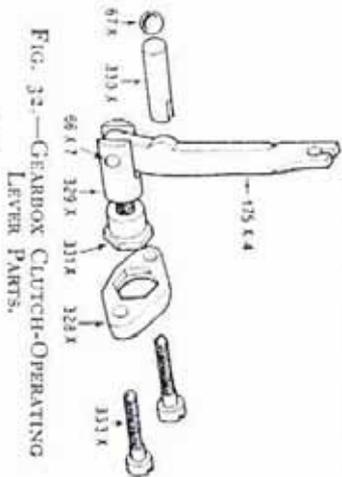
GEARBOX CLUTCH-OPERATING LEVER PARTS.
